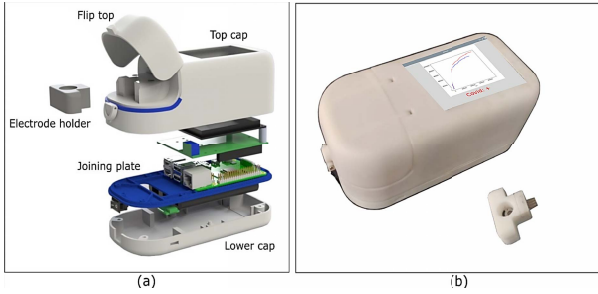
(a) Exploded view of SenSARS portable device. (b) Photograph of the physical instrument and SPCE on a holder.
